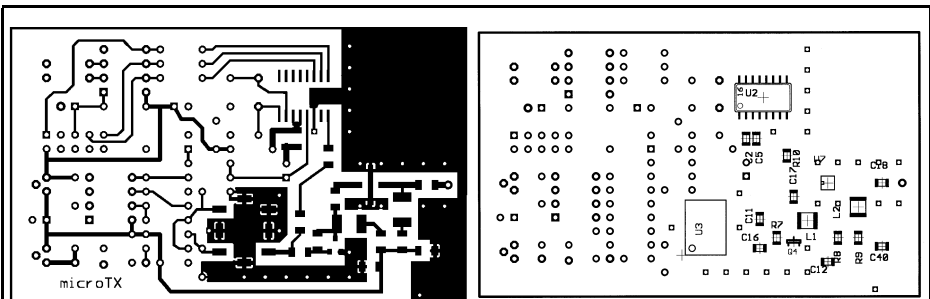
Bottom side of pcb for Microtx with smd component layout.
